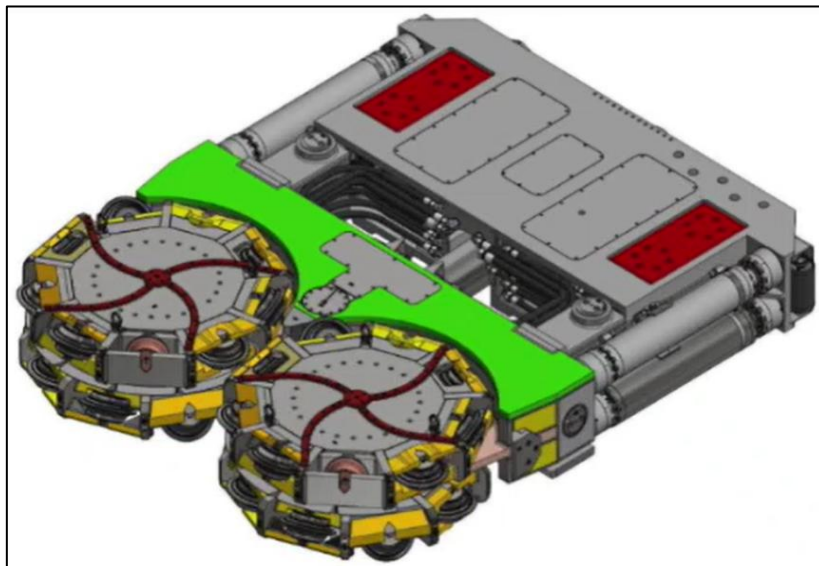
Master Drilling Reef Boring Machine (Van der Bijl, 2024)
